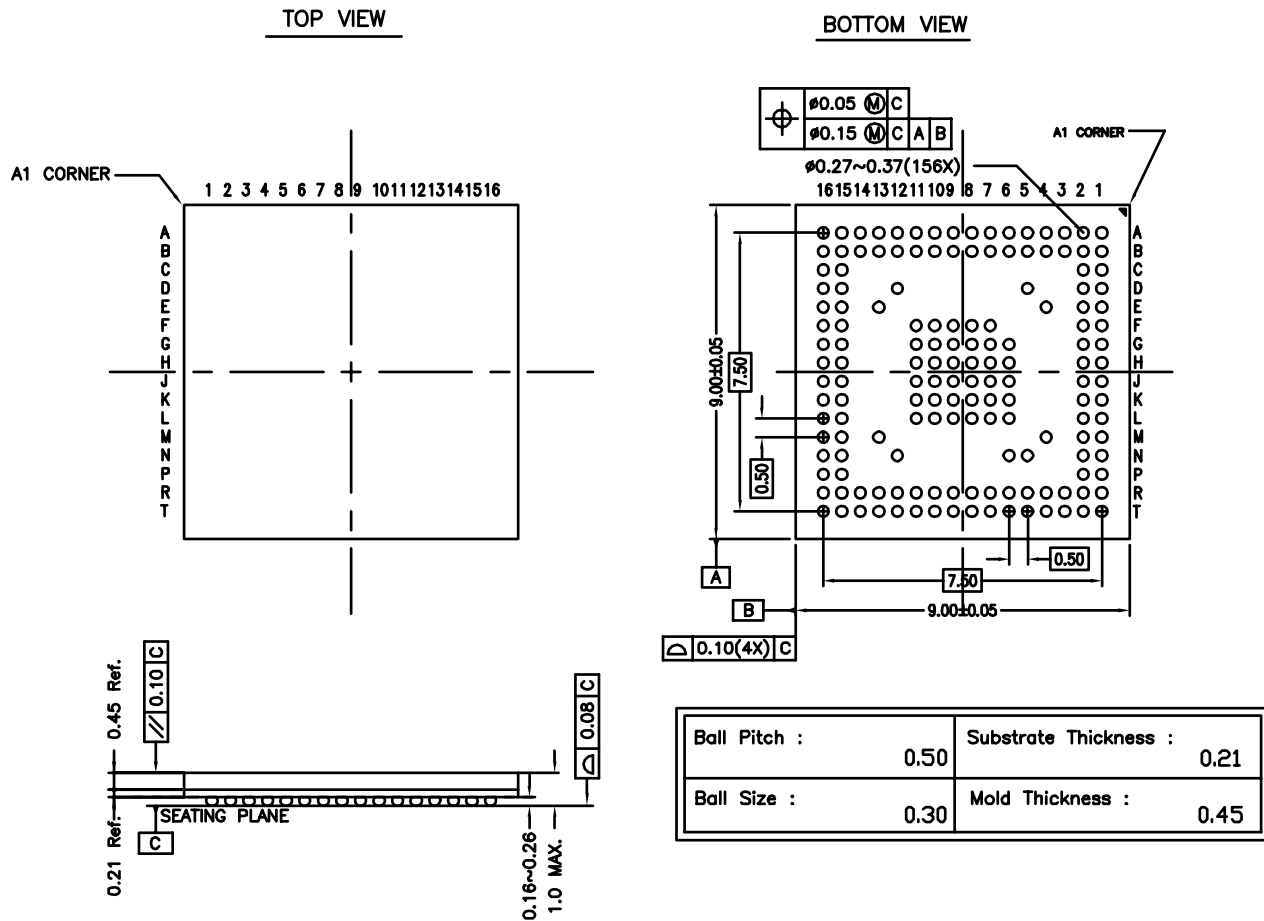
156-pin VFBGA Package Mechanical Dimensions
